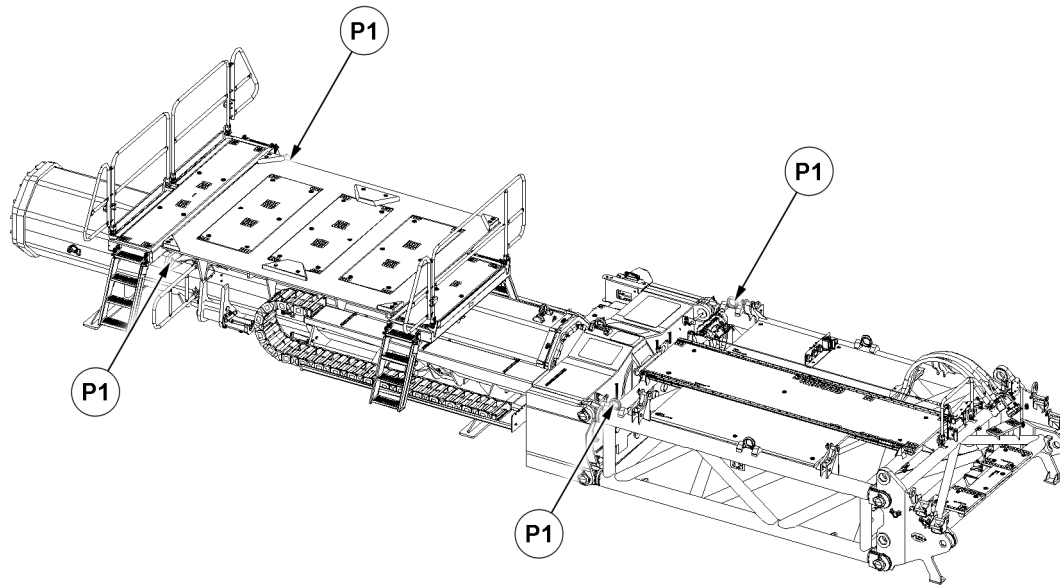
Ballast trailer guide fastening points with intermediate section and with adapter
